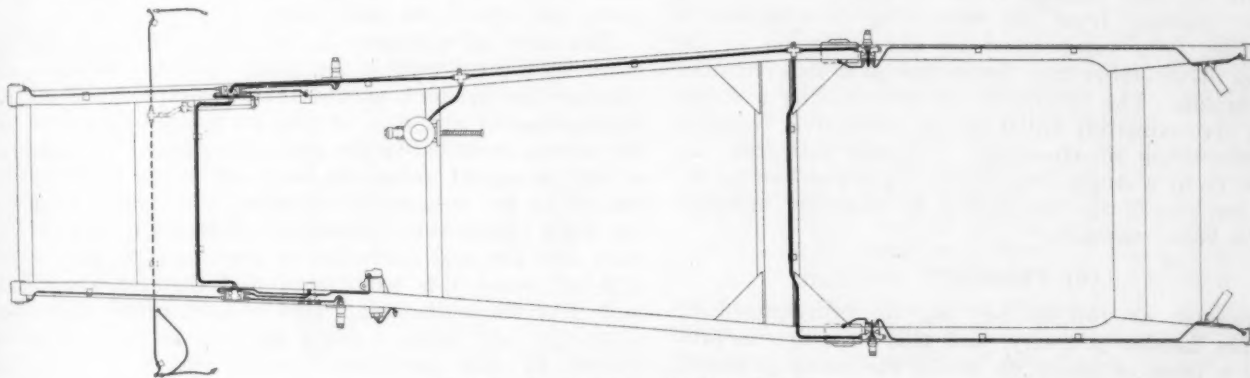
CHASSIS-LUBRICATION LAYOUT
